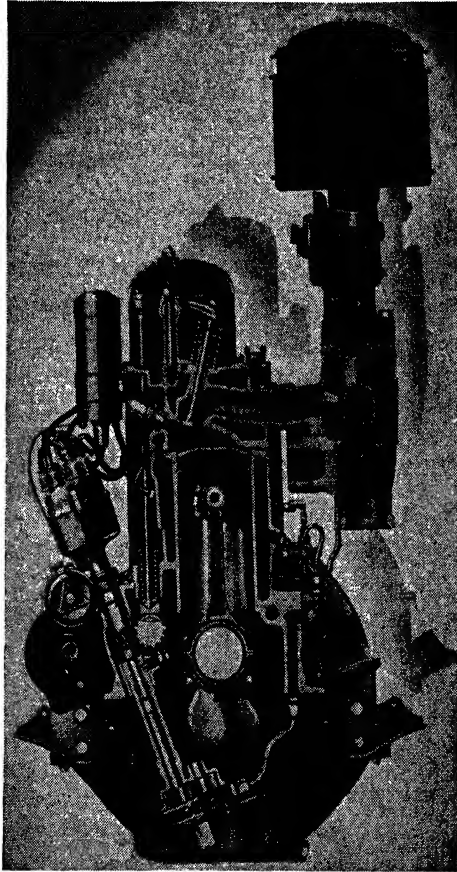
Cross-section of an automobile engine. (Courtesy Chevrolet Motor Co.)
